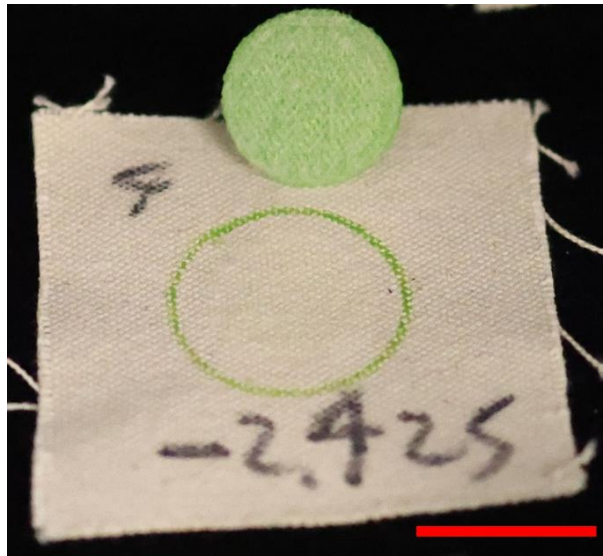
Tested plug sample with fabric left behind on the removed part, but no polymer is left behind on the fabric, ring shown on fabric is the brim and not part of the plug sample, red bar is 25 mm
